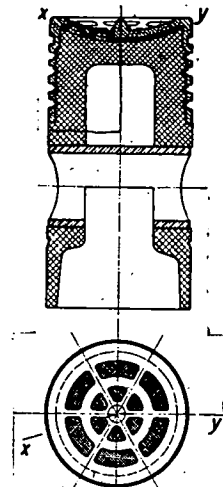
Two-stroke Diesel engine with special combustion chamber and high-temperature cooling.
